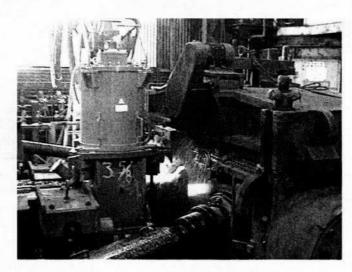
View of the inspection head located on-line measuring a tube being processed.
